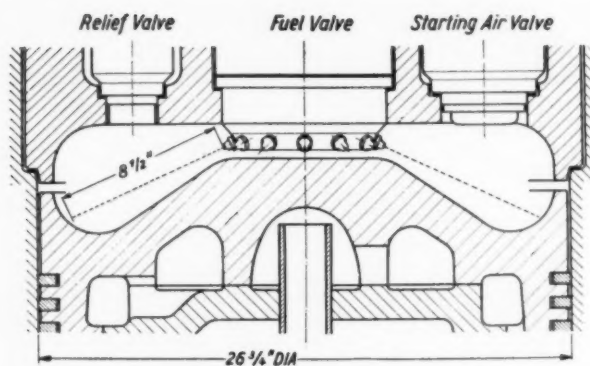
TOP COMBUSTION CHAMBER, SINGLE-CYLINDER, A.E.G.-HESSELMAN DIESEL ENGINE
